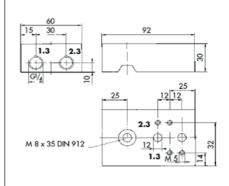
NAMUR rib adapter plate (dimensions in mm)
